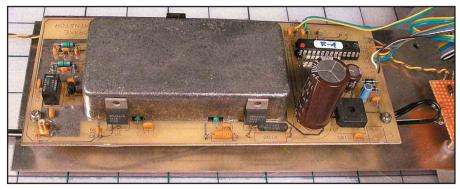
The shield must have some notches cut at its base to clear the components that penetrate the shield walls. Connections to the VFD display and rotary encoder are visible at the right. The PCB was mounted to a scrap piece of aluminum that acts as a subchassis.
